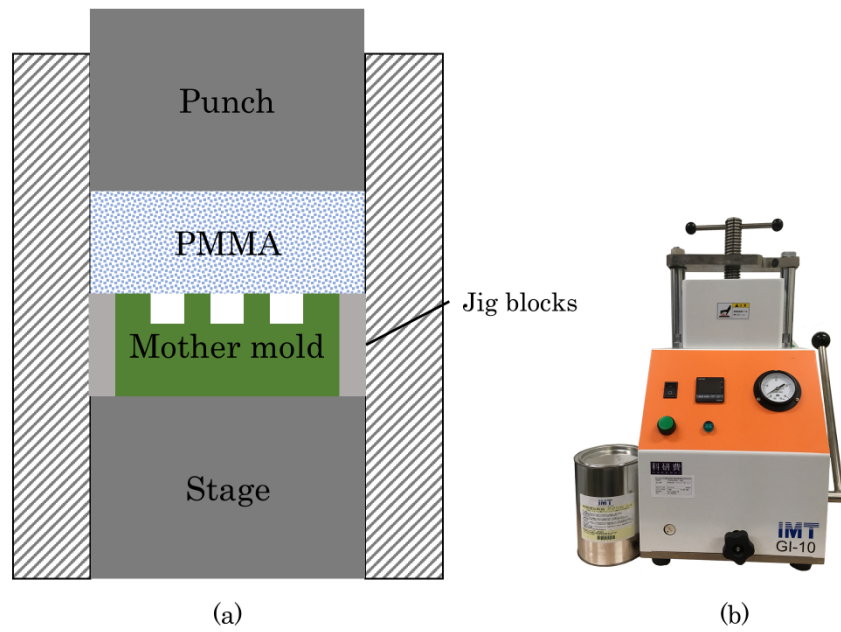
2 (a) Schematic illustration of the polymer molding setup. (b) a photograph of the molding device.
